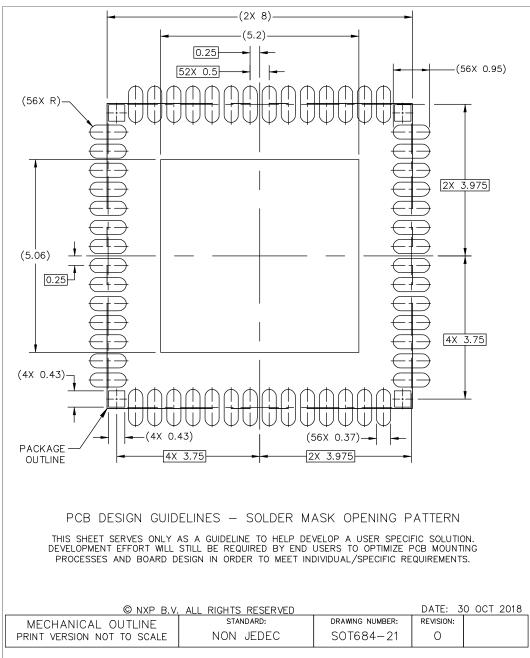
SOT684-21 Reflow soldering footprint - page 1
